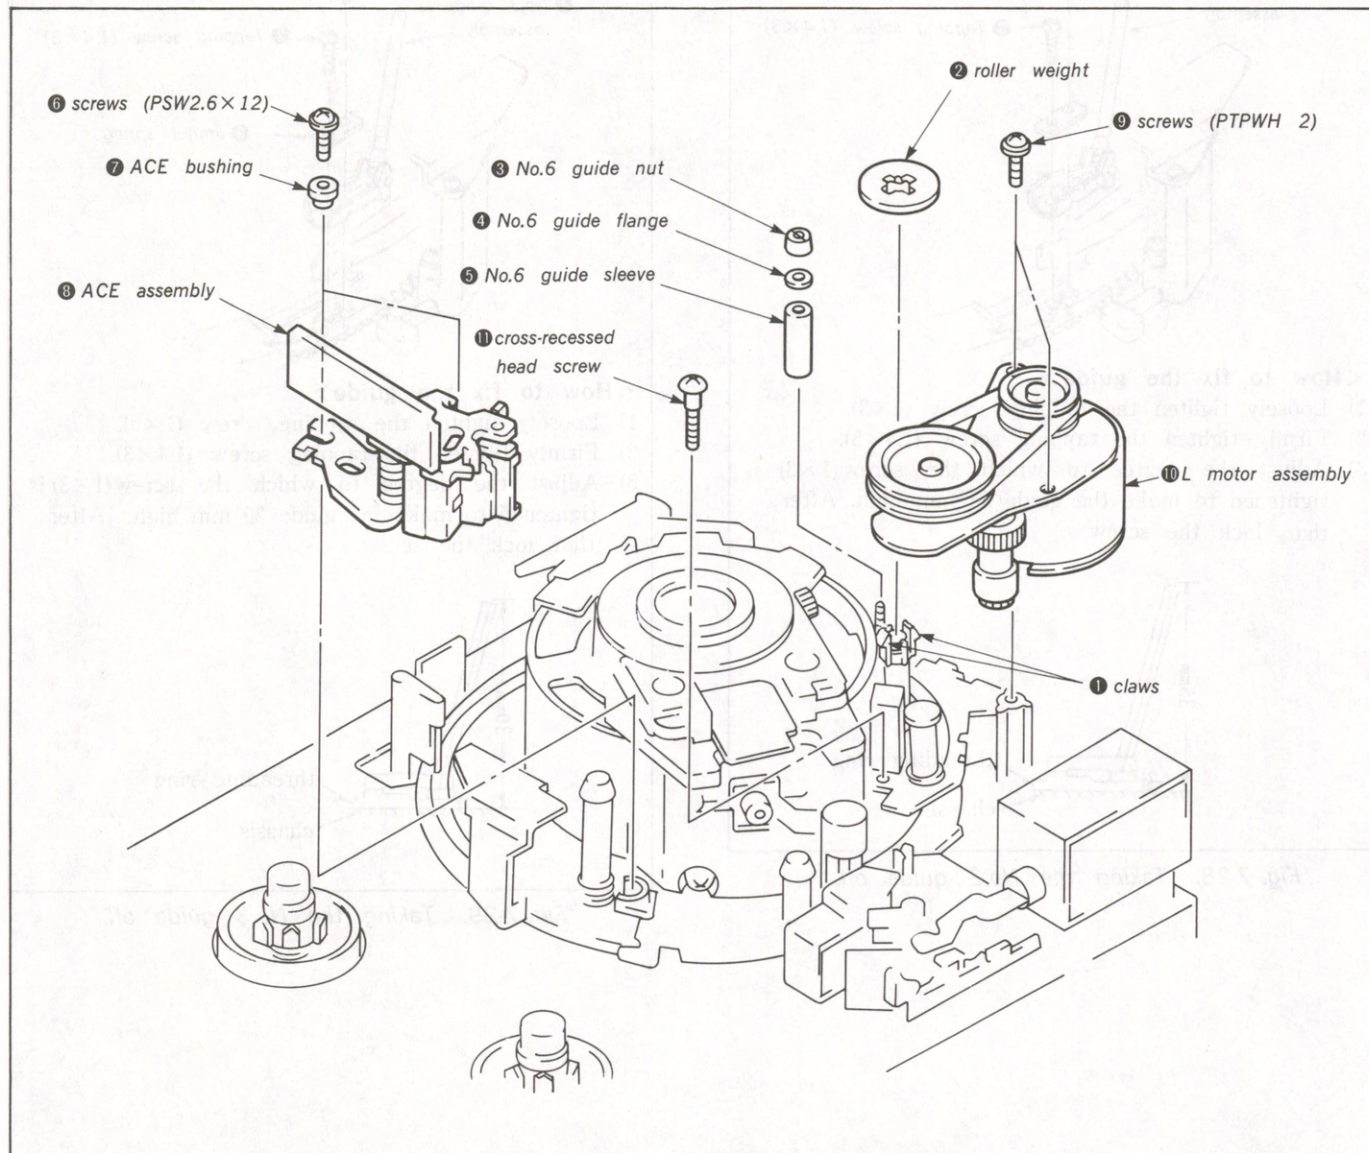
Detaching the ACE assembly the FE head and the loading motor.
